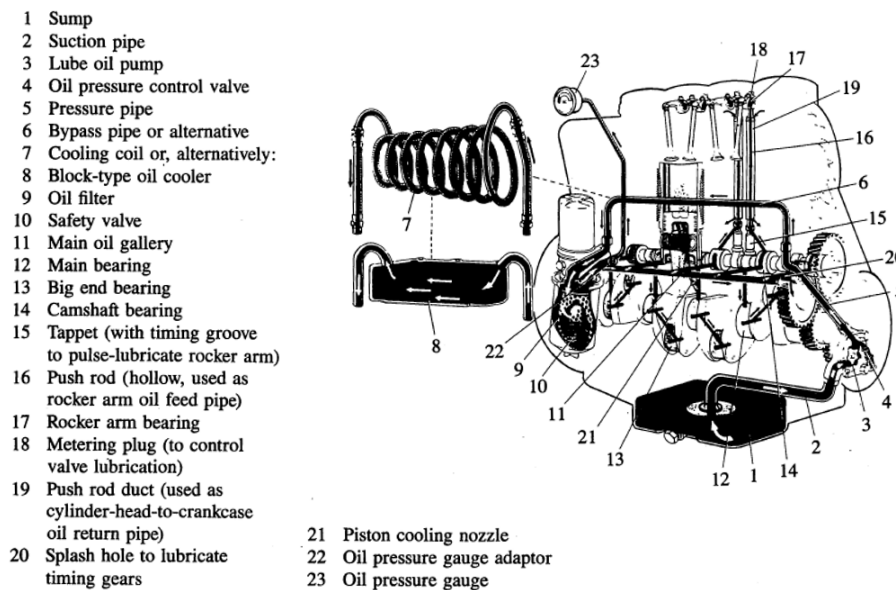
Lubrication system layout for an air-cooled diesel engine (*Courtesy Klöckner-Humboldt-Deutz AG from [4]*).
